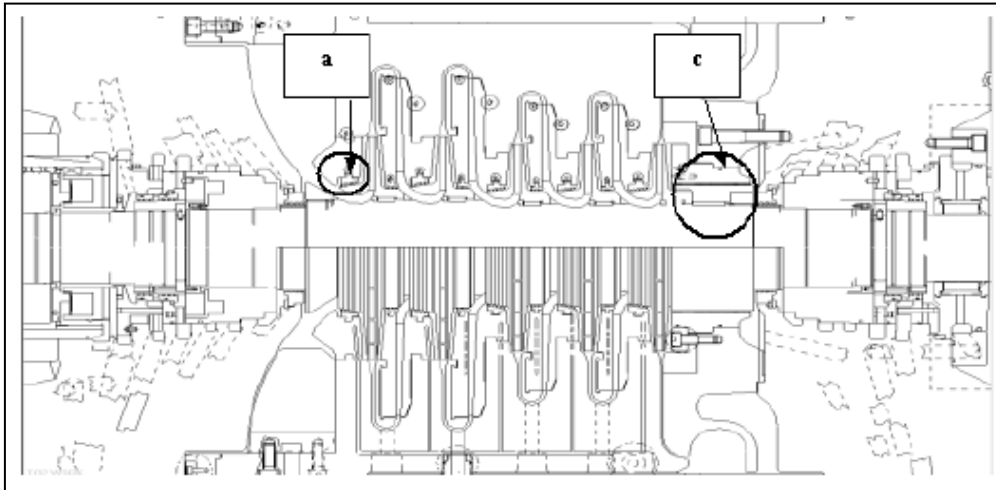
14 3rd compressor casing cross sectional , a) impeller shroud seal, b) Honeycomb seal[20]
